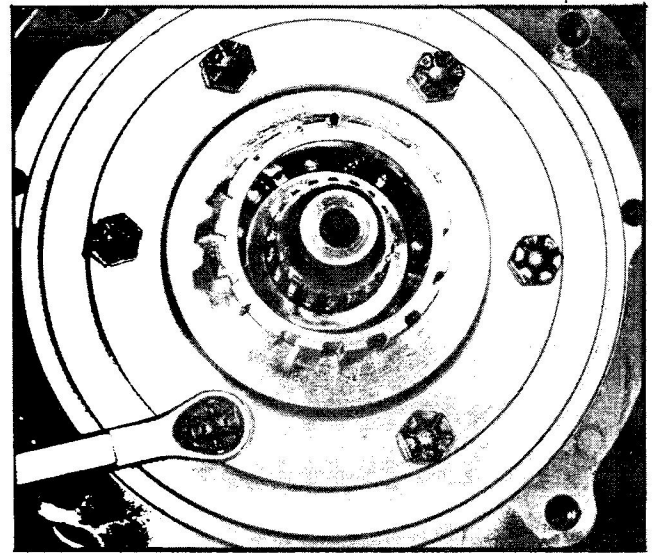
Remove Bearing Retainer Bolts (2 and 3 to 1 Ratio)
